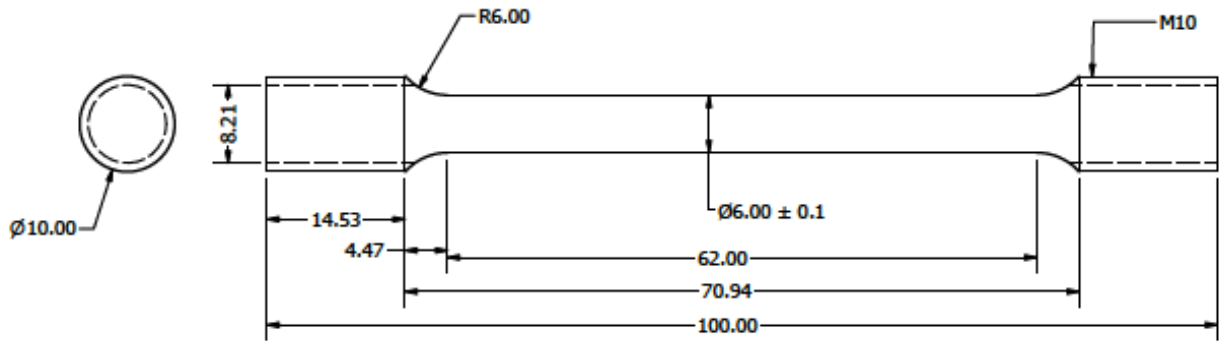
Machine drawing with dimensions (mm) of the tensile specimen.
